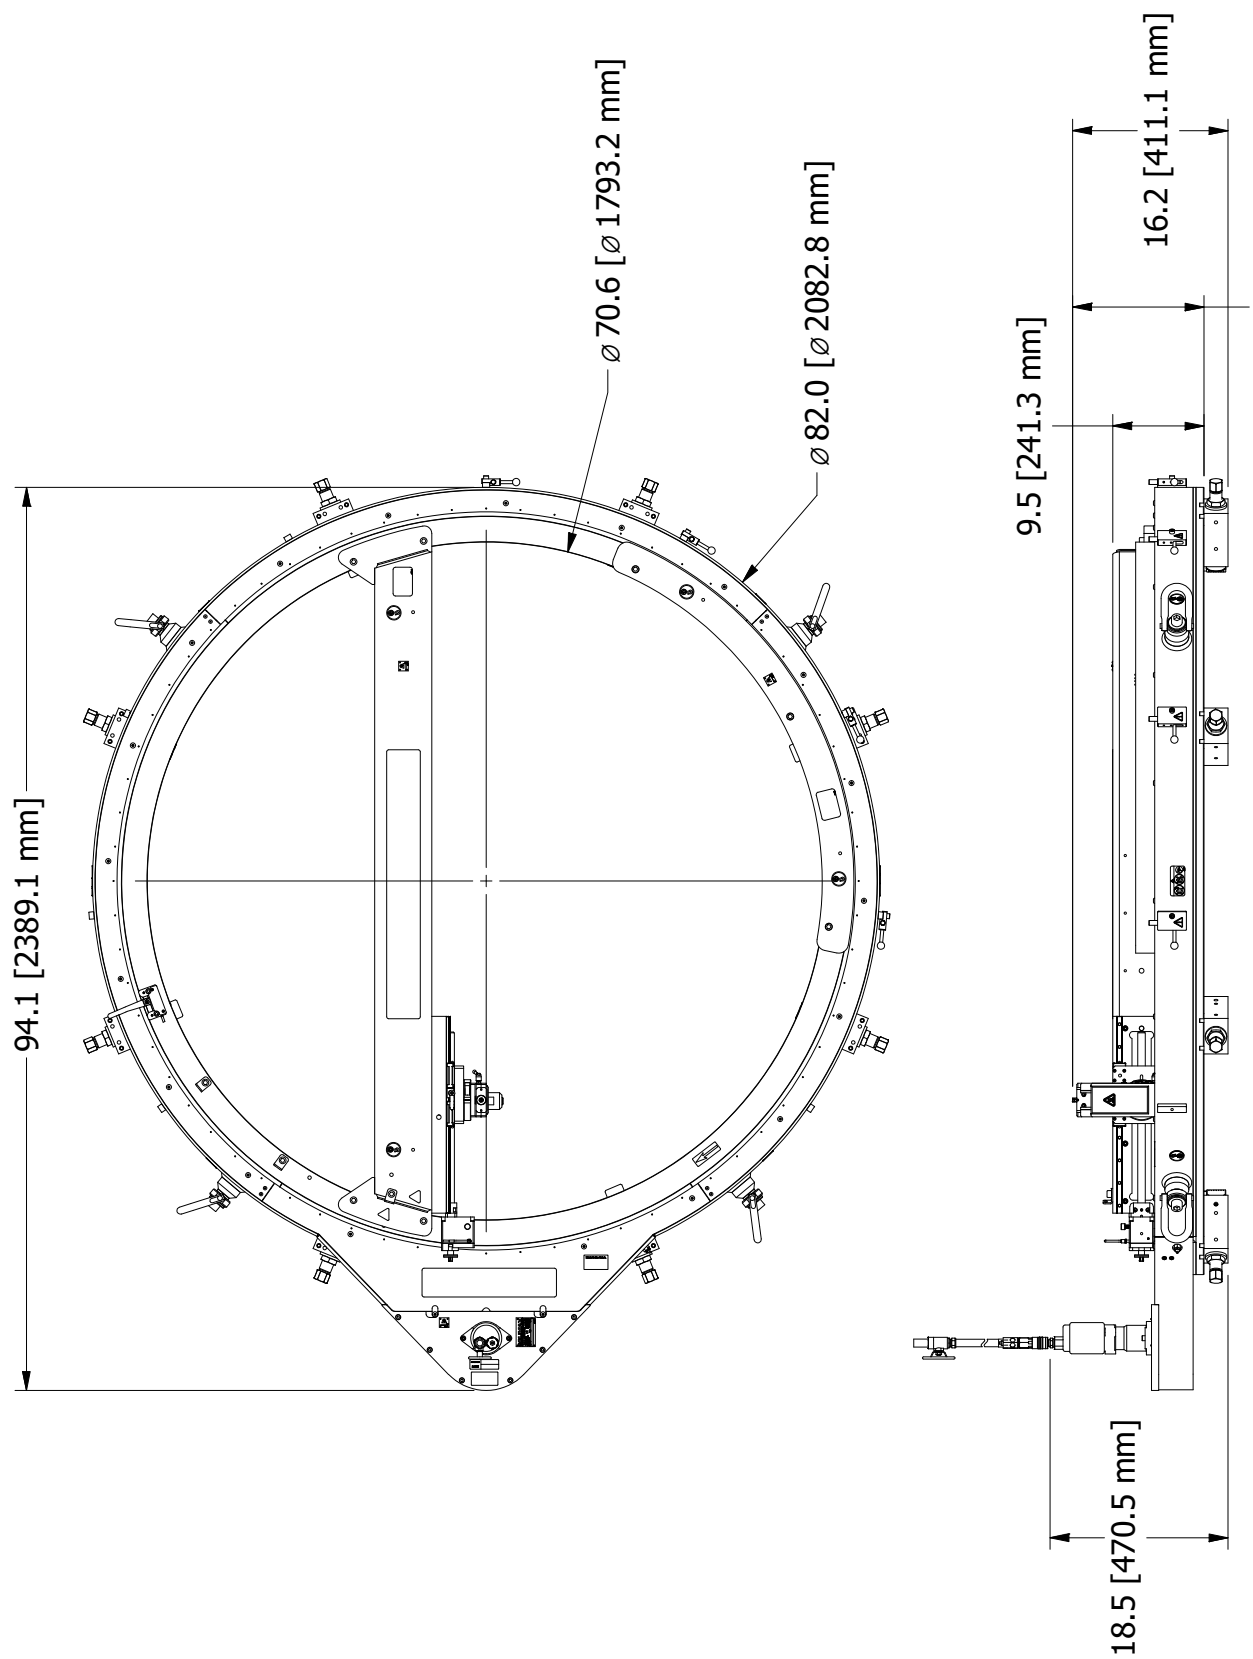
ODF70 SPEED FACER DIMENSIONS (P/N 87000)
